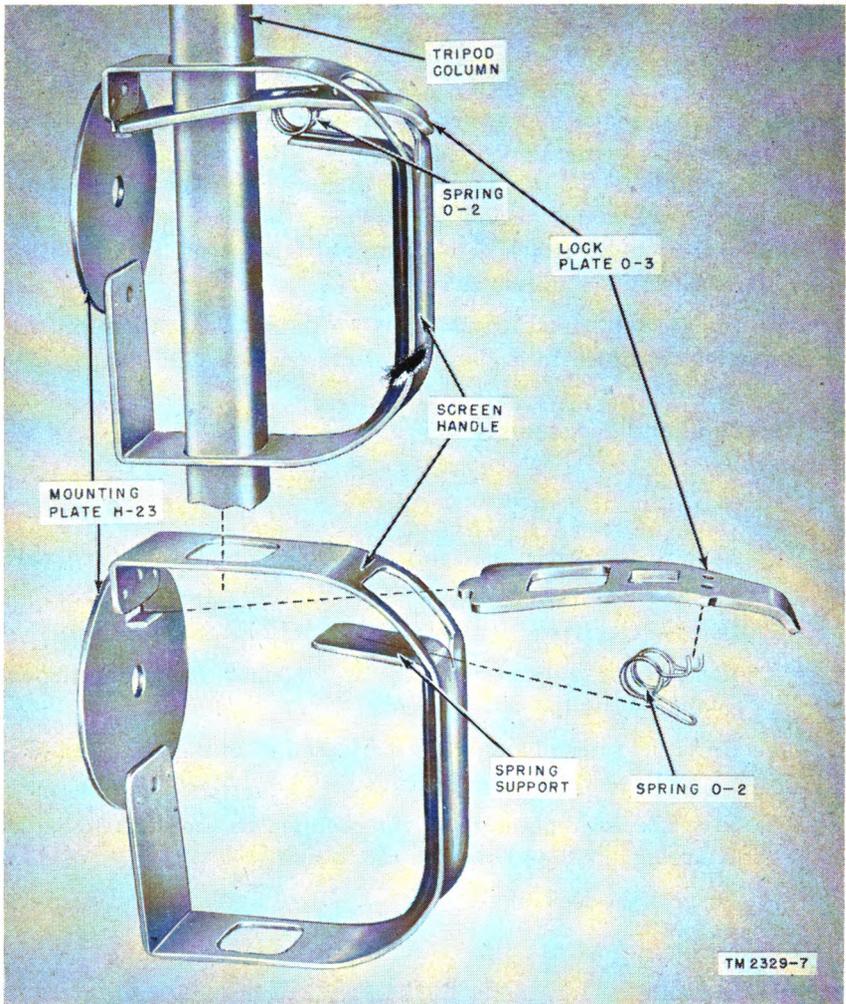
Screen PH-358-C, screen-handle assembly disassembled.
